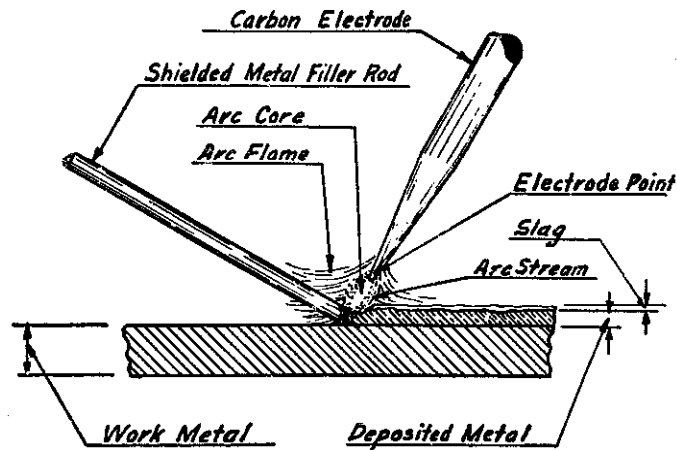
A diagrammatic sketch showing carbon arc welding.
